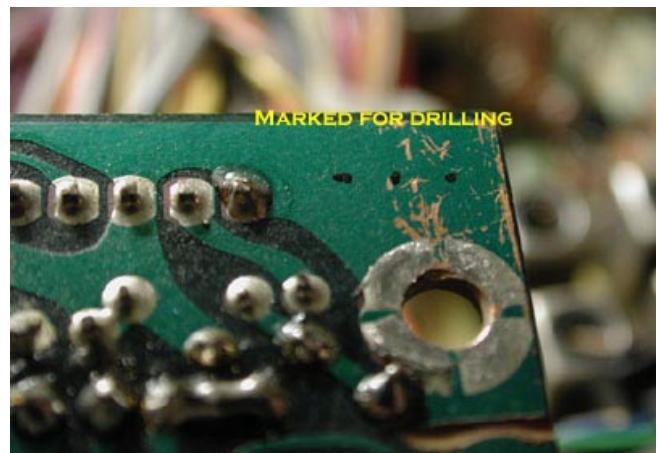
Using the 7808 pins as a template (or calipers, ruler or some other measuring tool) mark the board and then drill the holes.
